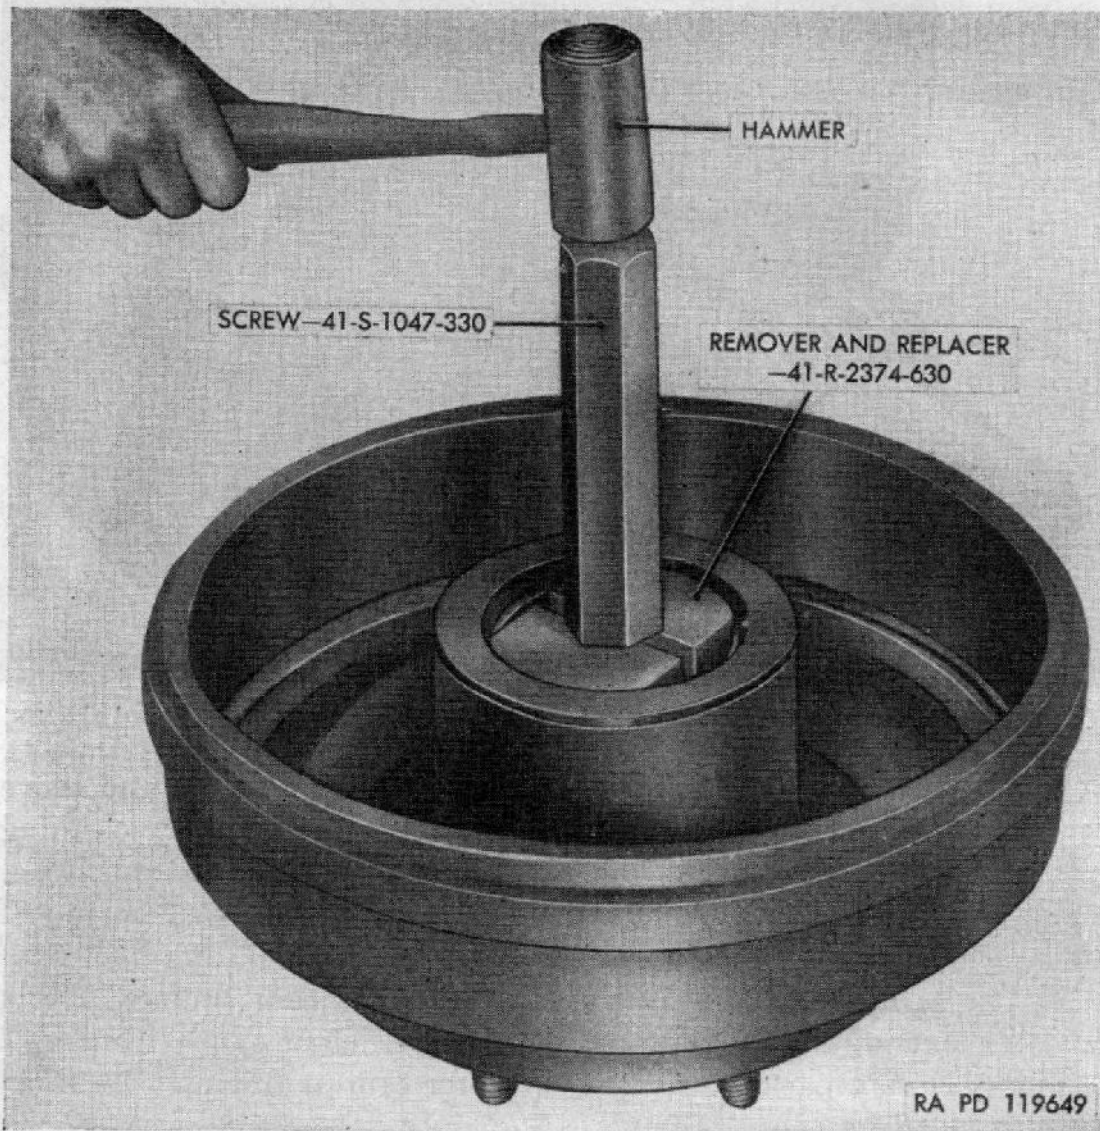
Installing inner bearing cup using remover and replacer 41-R-2374-630, and screw 41-S-1047-330.
